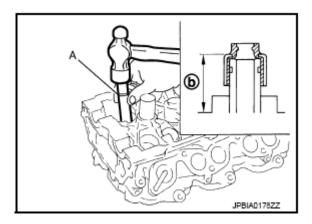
Pressing To Fit Valve Seal Using Valve Oil Seal Drift Courtesy of NISSAN NORTH AMERICA, INC.
